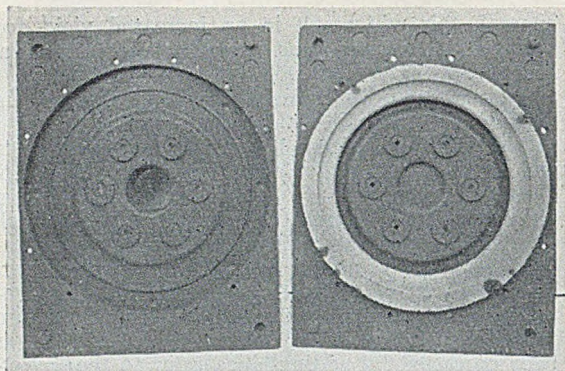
Mould Halves for the Wire-rope Sheave, with a Zircon Core.
